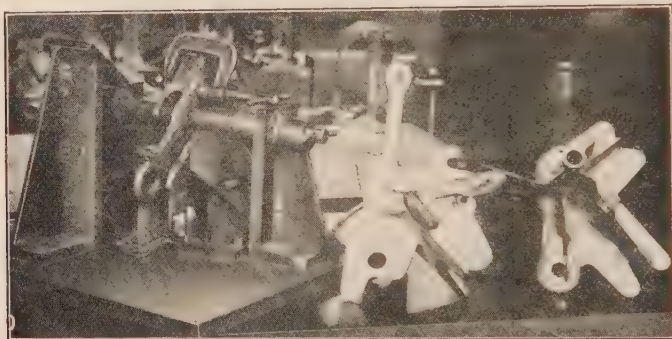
A Glenn Martin fitting and welding fixture.
